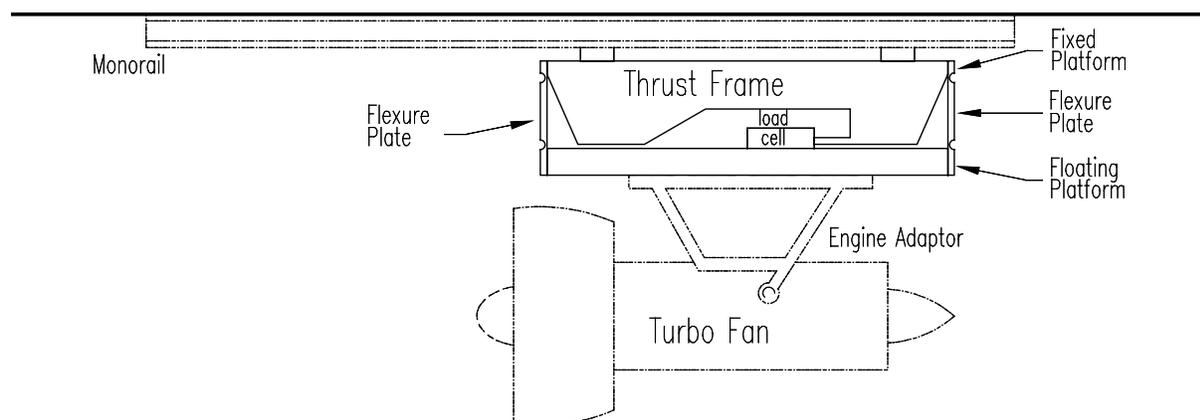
TYPICAL THRUST MOUNT DESIGN
